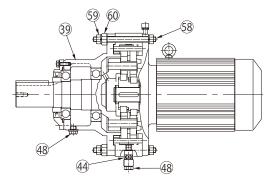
Type CVVM (Vertical, Gearmotor), 1 Stage Reduction (Example: Frame size 6145)
